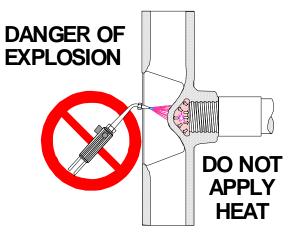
B Do not apply heat in order to remove the impeller
